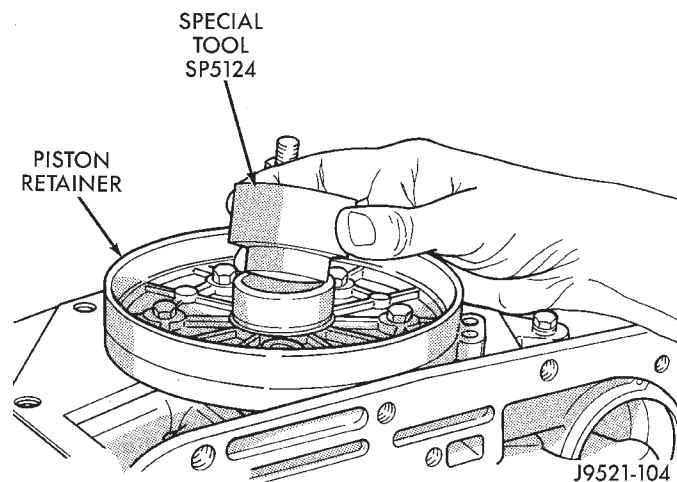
Positioning Adapter Tool In Overdrive Piston Retainer
